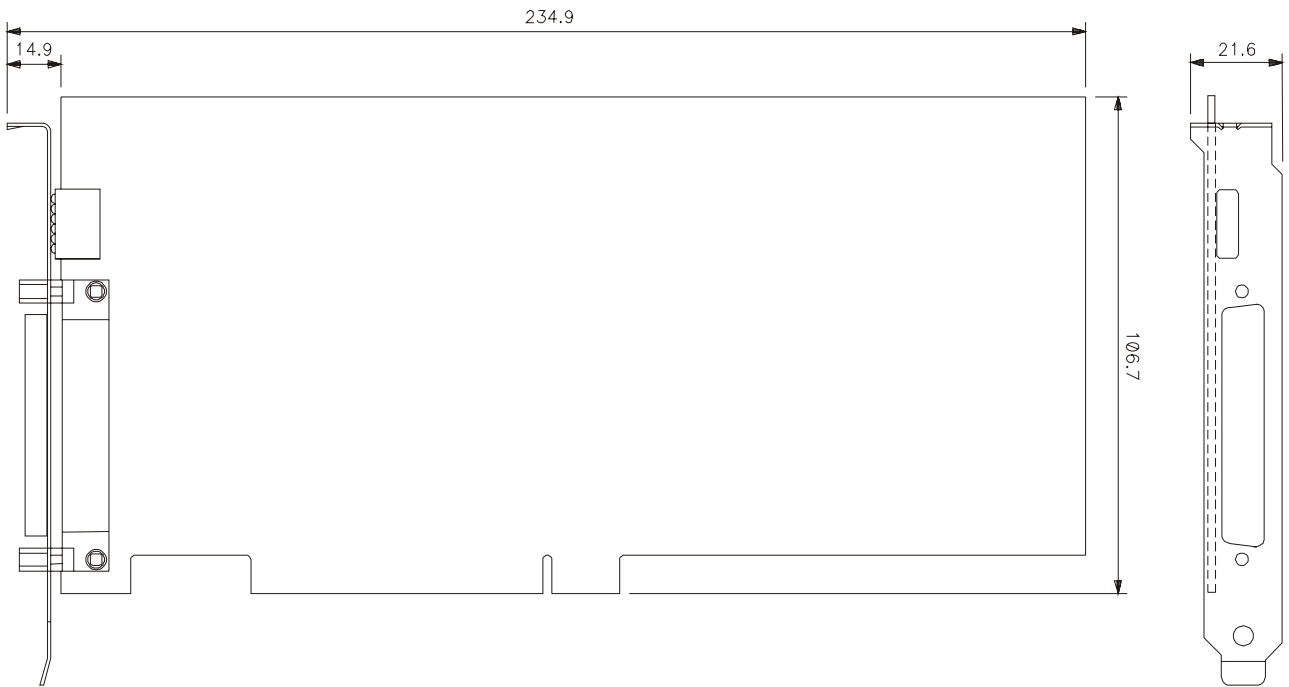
PCI302 card V2.0 Physical dimensions (mm)
